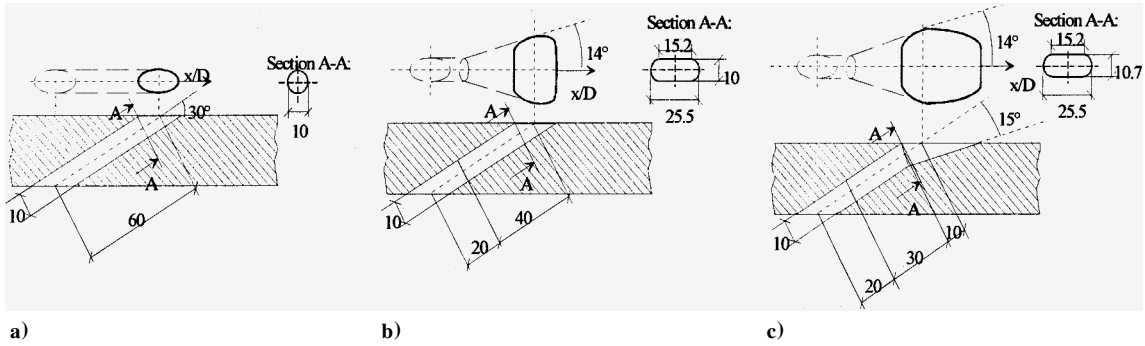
Geometries of film-cooling holes: a) cylindrical, b) fan-shaped, and c) laidback fan-shaped.<sup>17</sup>
